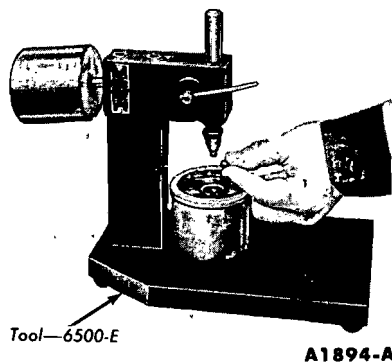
Placing Steel Ball in Valve Lifter Plunger
